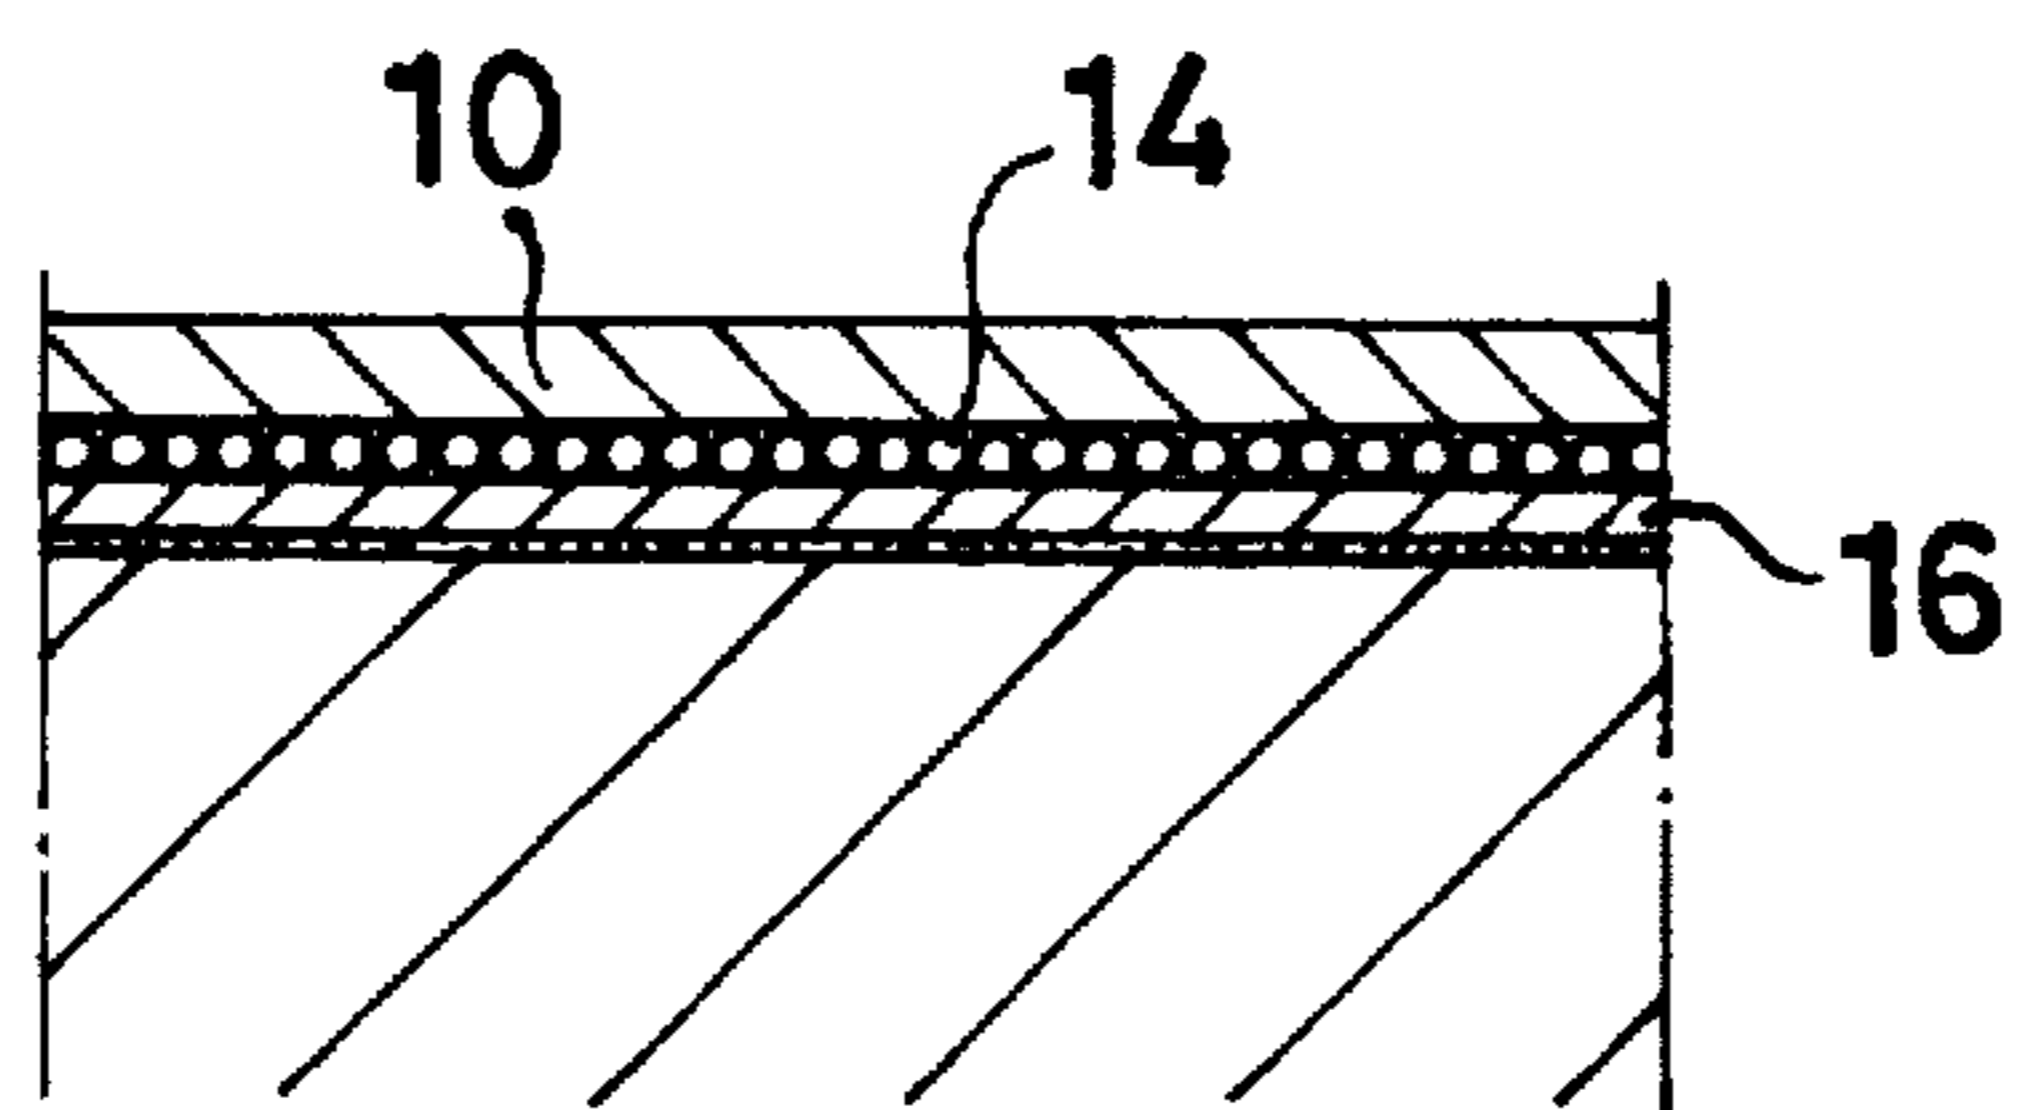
PLATE CYLINDER HAVING GLASS BEADS THEREON FOR A SHEET-FED PRINTING PRESS
